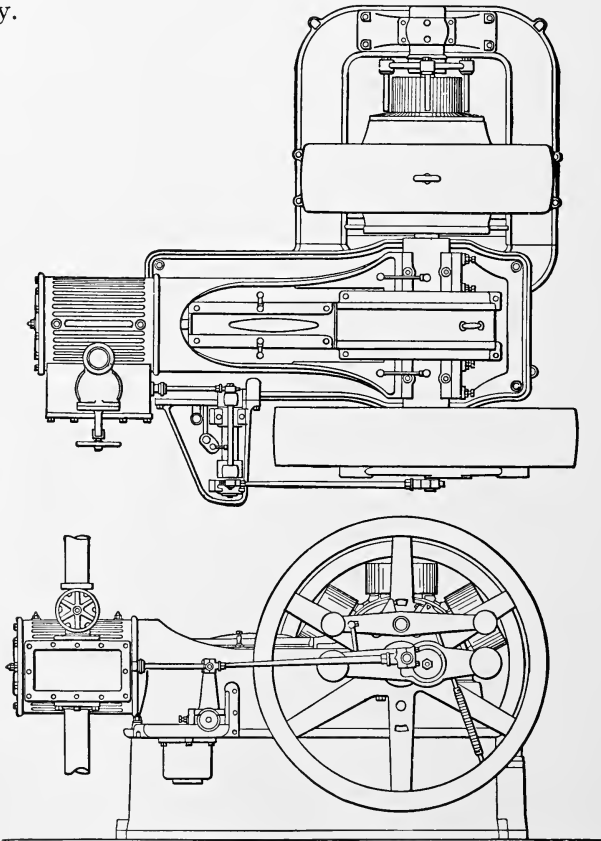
Typical Piston Engine, Single Cylinder, Automatic Governor.
